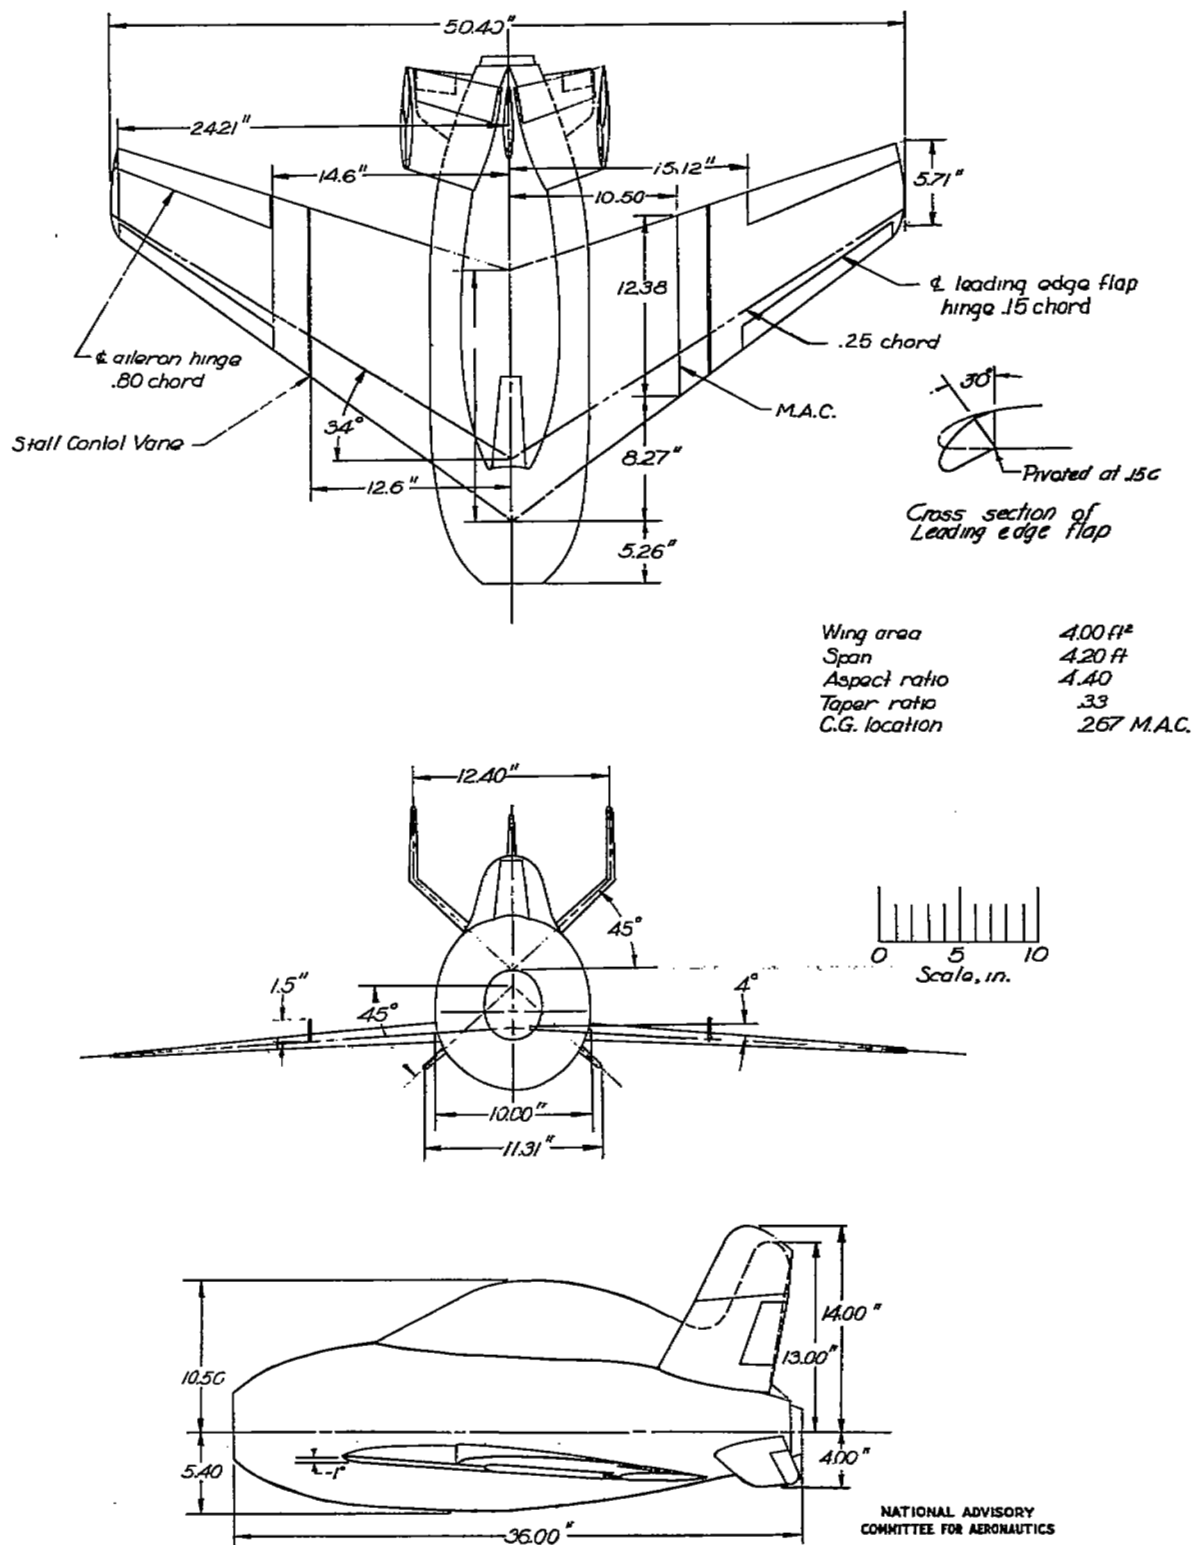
Three view drawing of the 1/5-scale model of the McDonnell XP-85 tested in the Langley free flight tunnel. Five unit tail assembly.
